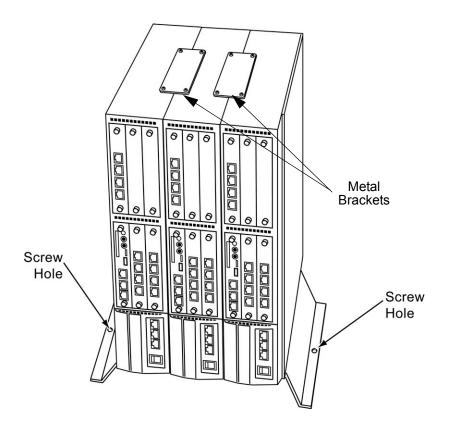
Install Additional CHS2U STAND KIT (EXT)
